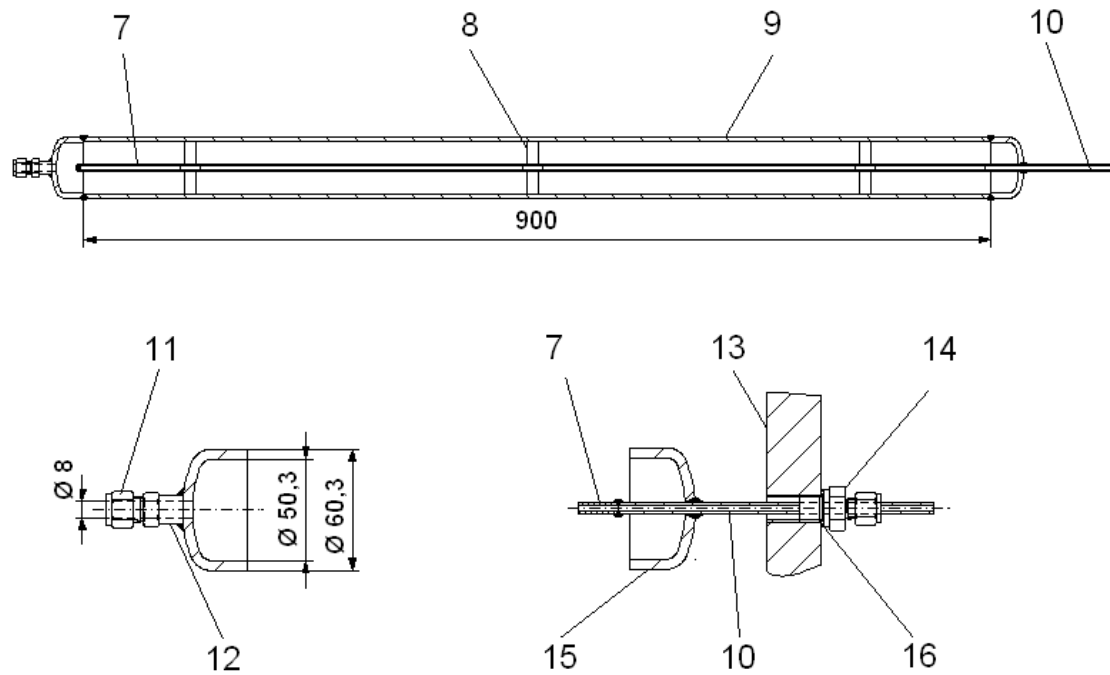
Details of reactor element: (7) porous sintered metal tube, (8) support of sintered metal tube, (9) reactor element shell, (10) gastight hydrogen supply tube, (11) closure plug, (12) male connector (bored through, 8 mm for filling of active material under glove box conditions), (13) flange, (14) male connector (bored through), (15) torispherical head, (16) copper gasket
